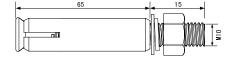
Dimensions of Expansion Bolt Set for Concrete Wall (unit: mm)
